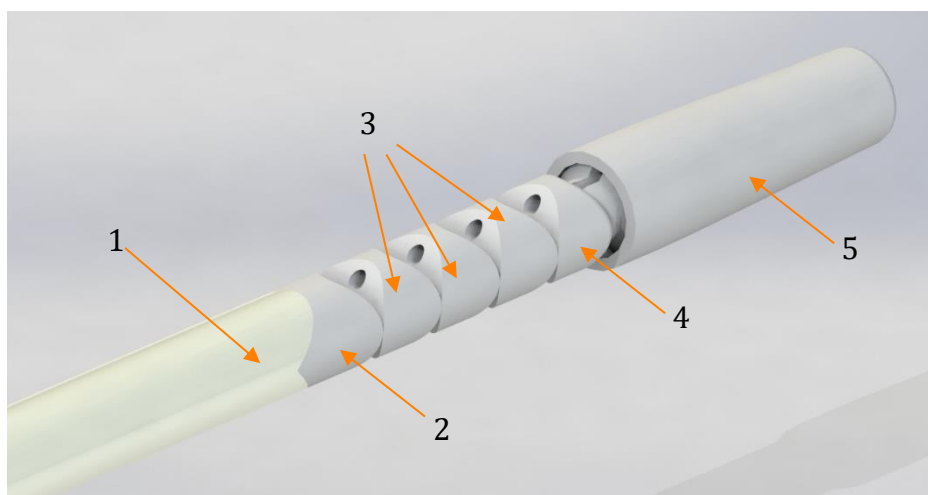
Segmented Tip Close-Up. The tip consisted of (1) PTFE Tube, (2), Lock Segment, (3), Rolling Segment, (4) Head Segment, and (5) Cap Segment.
